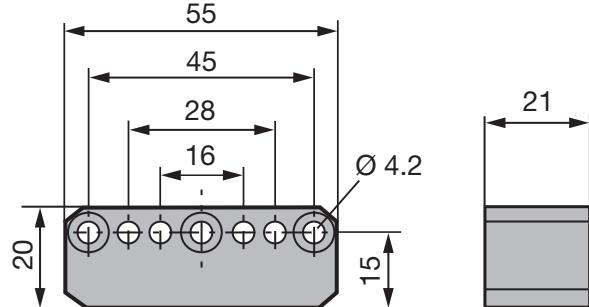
Installation dimensions of BTL5-P-5500-2 magnet
